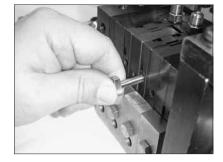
Removing a pressure transducer plug (pump location shown)
